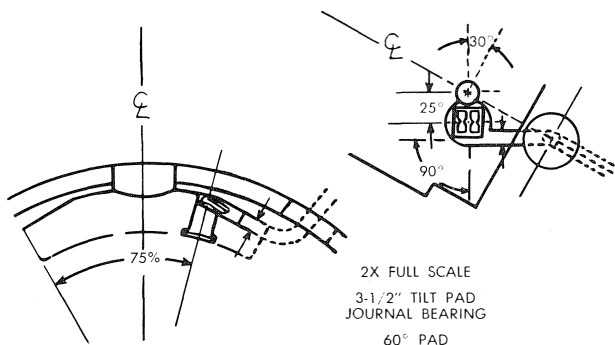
Temperature Sensor Imbedded in Tilt Pad Journal Bearing.
